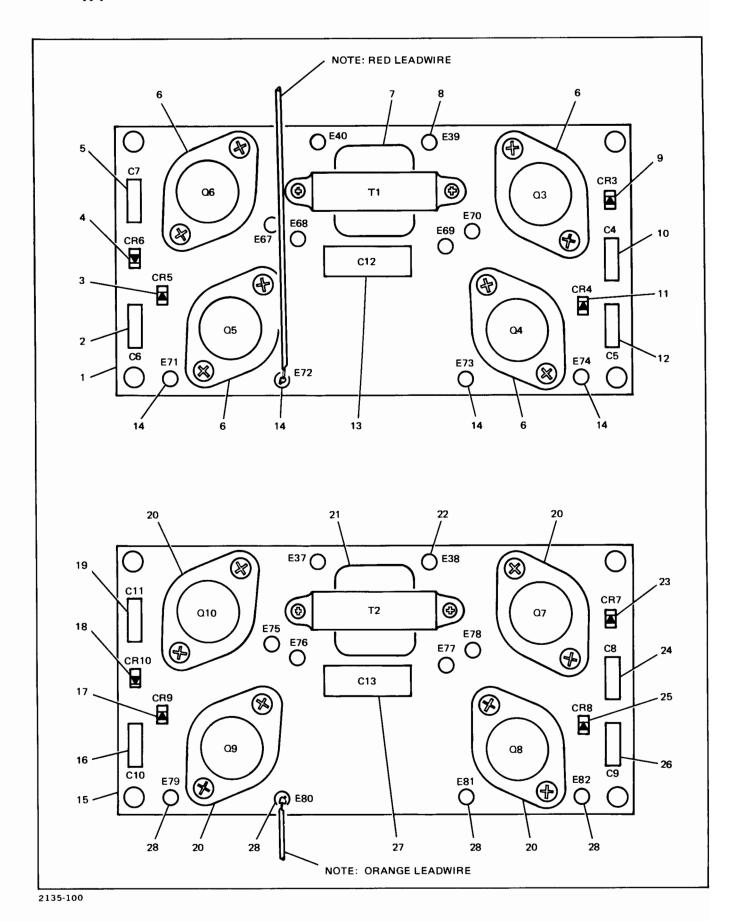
Inverter Assembly (02100-60114), Exploded View
